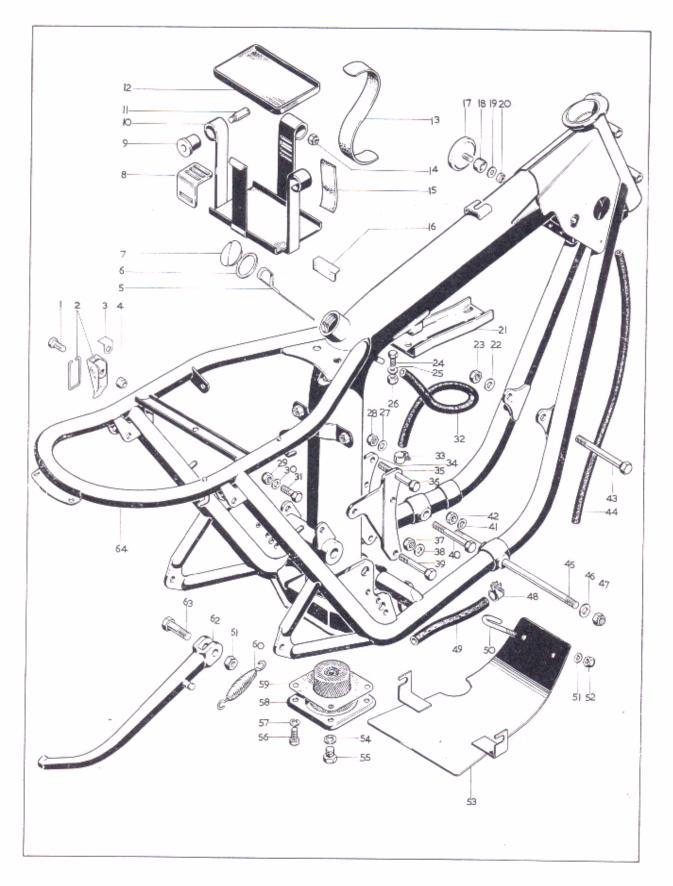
continued FRAME — BATTERY CARRIER — ENGINE SHIELD
